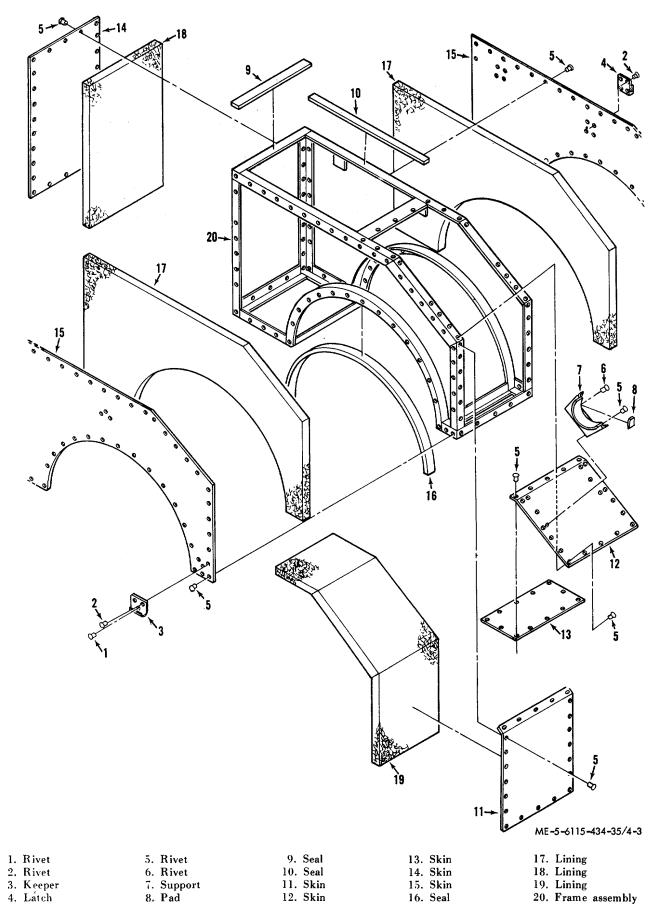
Air inlet plenum assembly, upper, exploded view.
